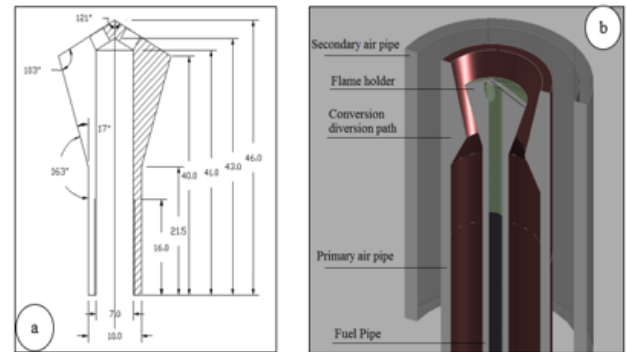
Burner schematic (a) Flame holder dimensions (dimensions in mm) (b) A 3D section for pipes and flame holder arrangement.
